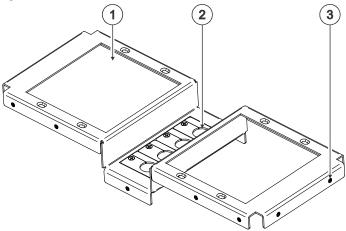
TBUS-18xl Inner Frame (P/N: 80-000046)
